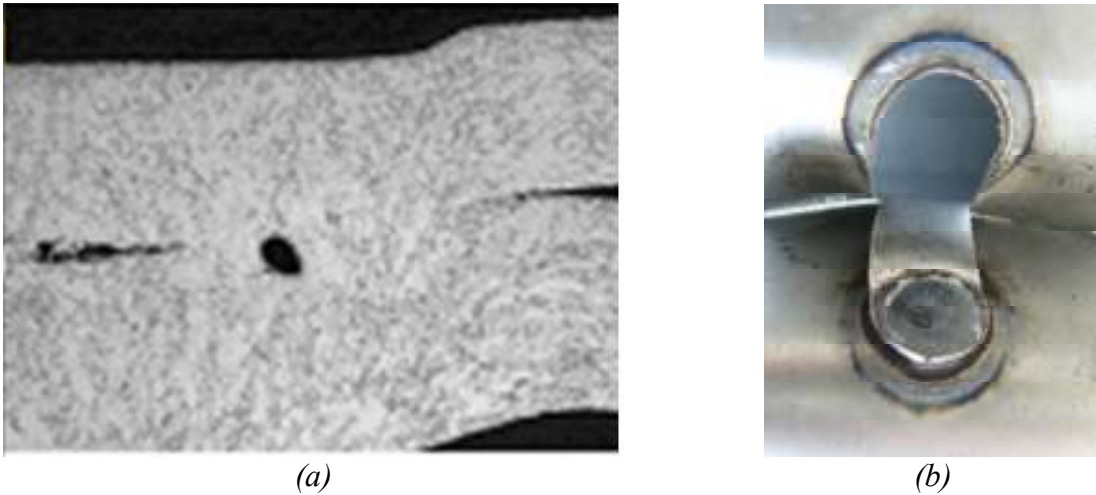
Example of obtained weld by (a) cross-section of sheet (upper) and tube (lower) and (b) resulting plug failure upon separation.
